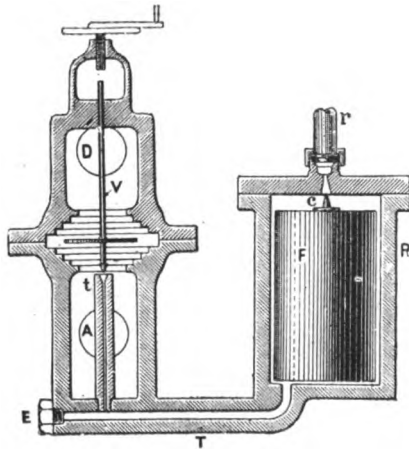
SECTION OF DE DIETRICH CARBURETTOR.
